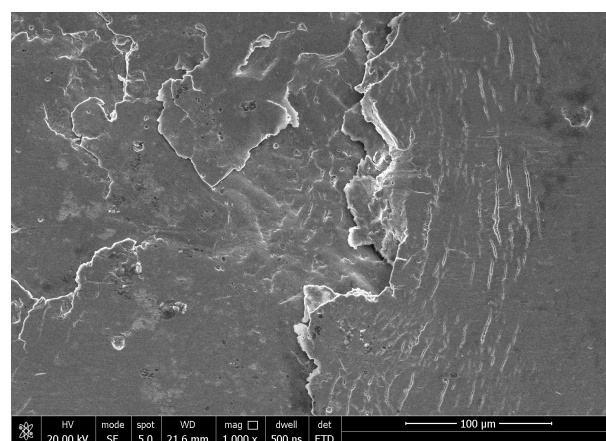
Contact fatigue spalling morphology of the inner ring raceway.
